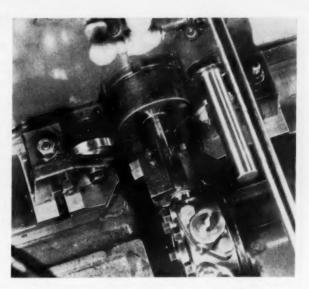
In this illustration, α box tool with V-block back rest is shown taking α finishing cut. Illustration courtesy Brown δ Sharpe Manufacturing Company.
